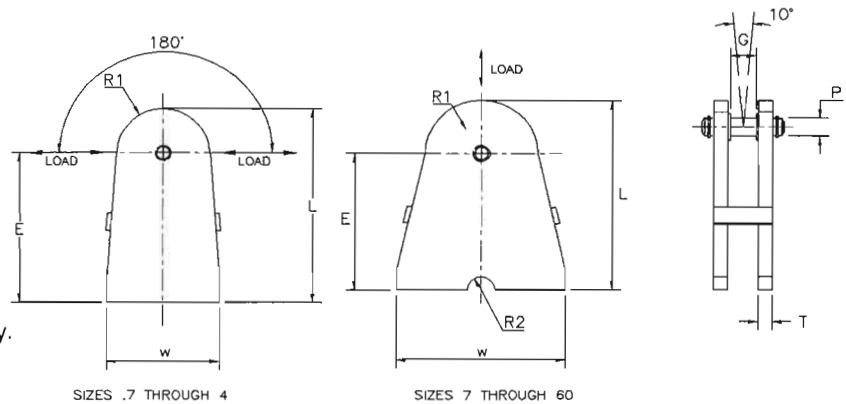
WELDING LUG ATTACHMENT
